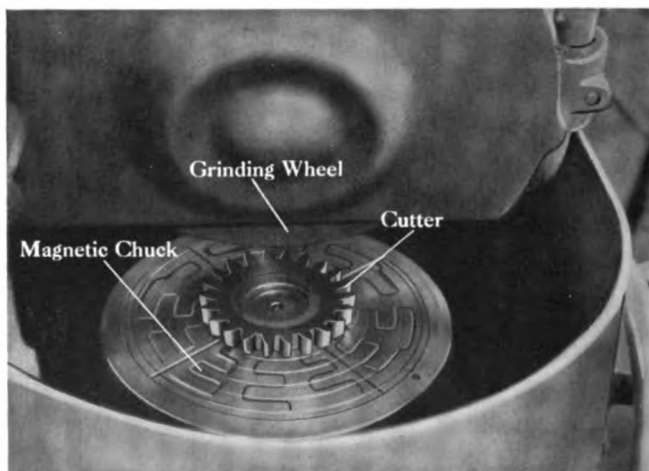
Sharpening Spur Gear Shaper Cutter on a Rotary Surface Grinding Machine
